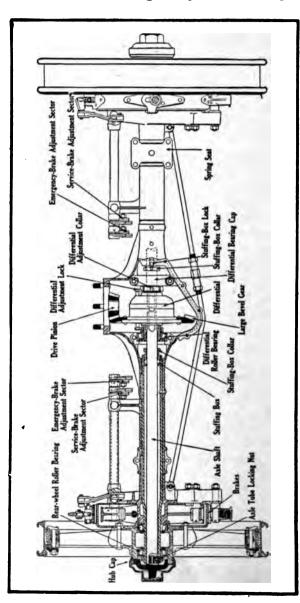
Part Sectional View Showing Overland Full Floating Bear Axie.
